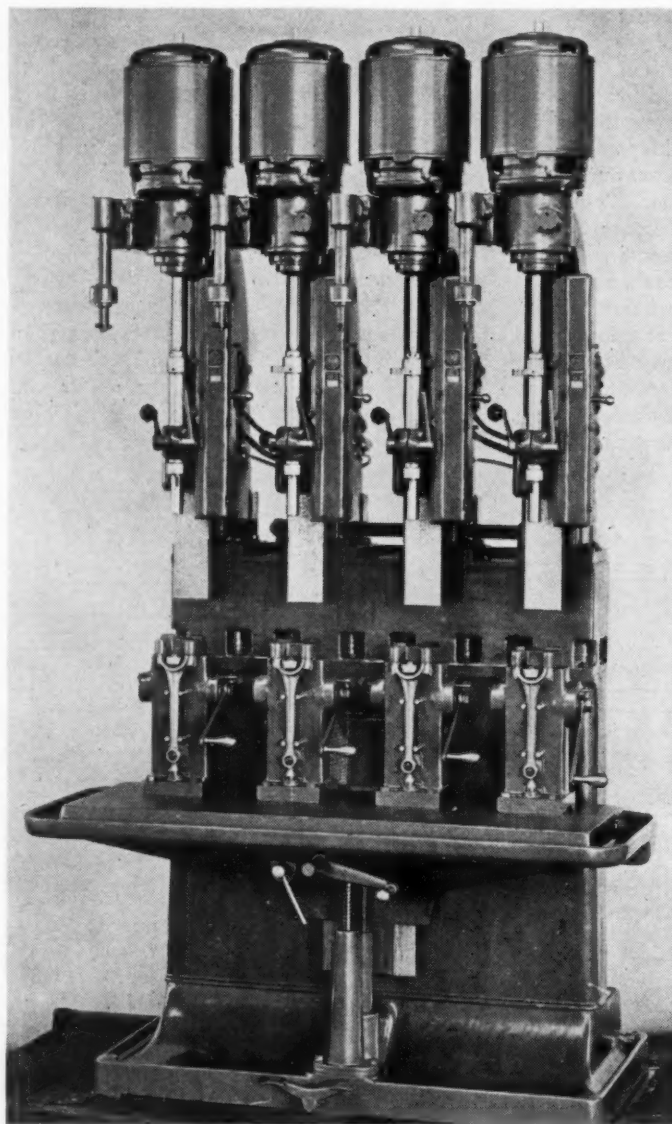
TYPICAL FOUR-SPINDLE AUTOMATIC MACHINE FOR STEP DRILLING THE HOLE IN AN AUTOMOBILE-ENGINE CONNECTING ROD
